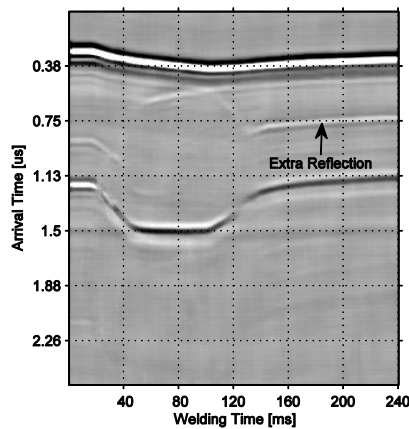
M-Scan for an aluminum stick weld.
